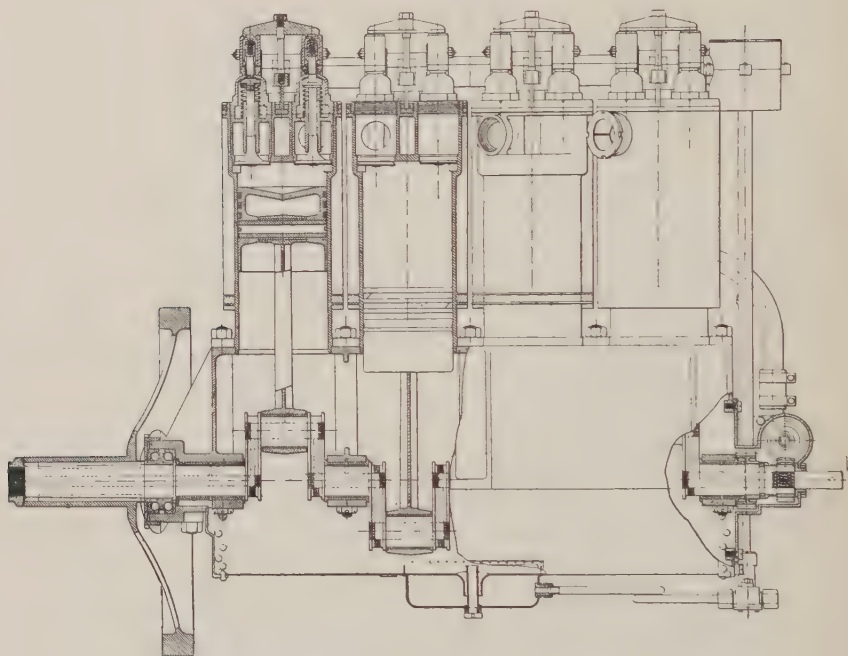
Green engine. Longitudinal part. Sectional elevation.
